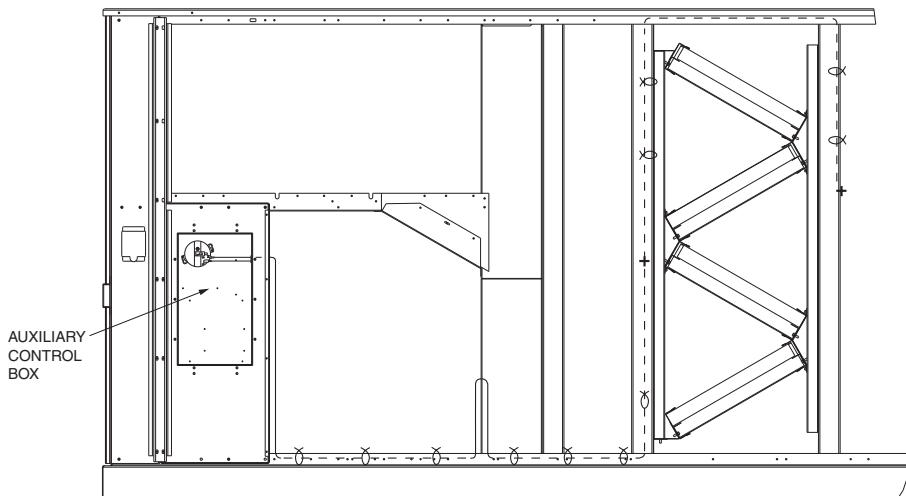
Auxiliary Control Box Location (Sizes 030-050)
